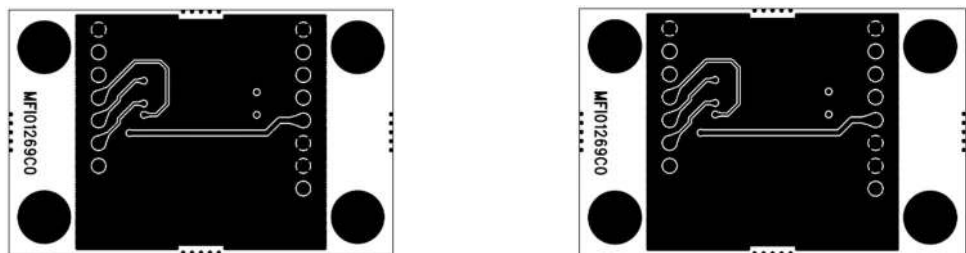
TOP (left) and BOTTOM (right) layout of SCC400T PCB (aspect ratio not 1:1).
